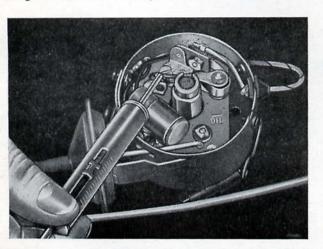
Checking the tension of the circuit breaker moving contact spring
